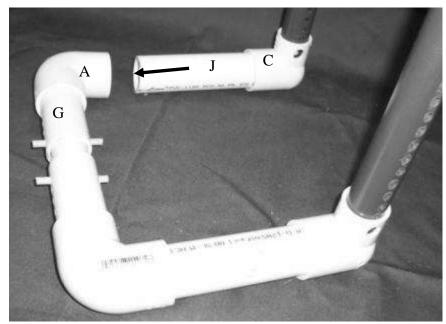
Assembly of the Medium/Large Wheelchair (Step 17).
